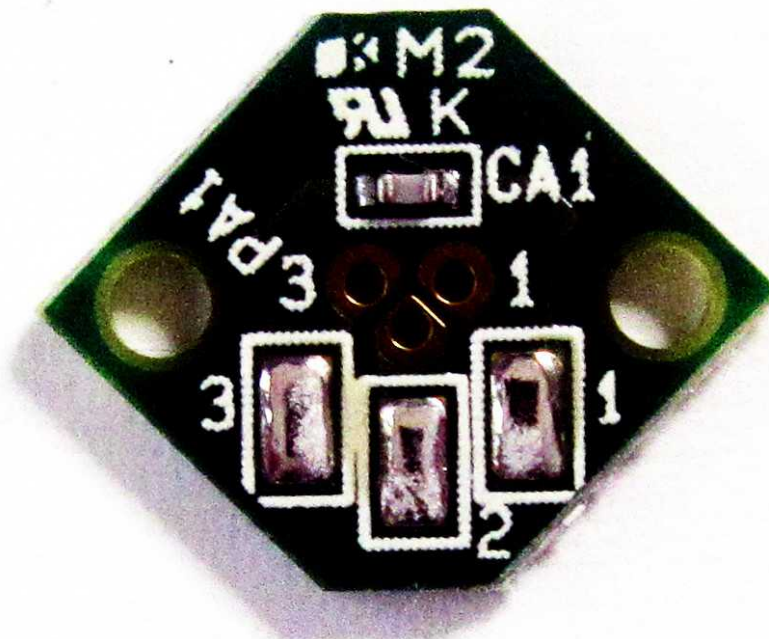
DS-SENSOR-B01A0-00_PCB_Photo_SolderSIDE
